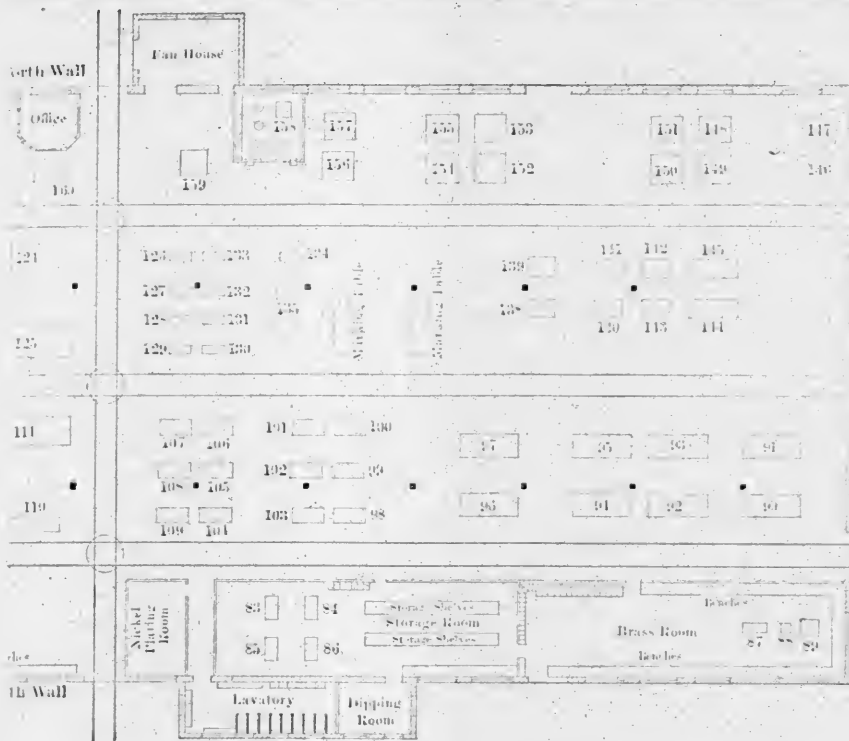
PARTIAL PLAN OF THE CAR MACHINE SHOP.
